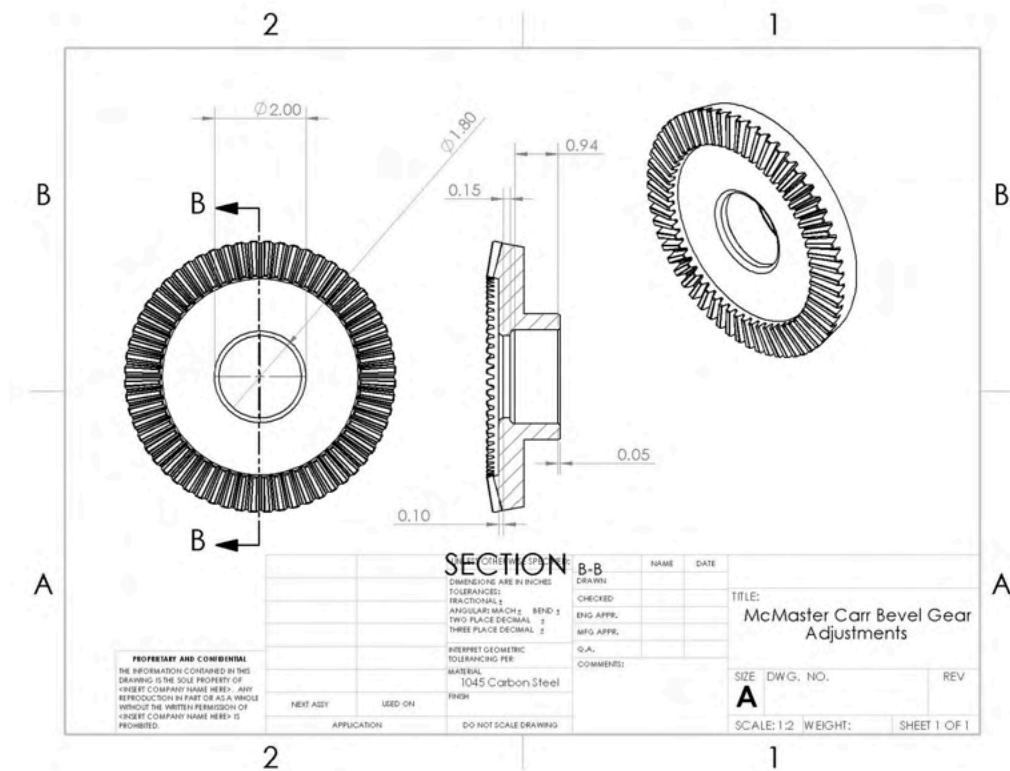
Edited Gear Measurements Drawing (For Gear With Bearing)
